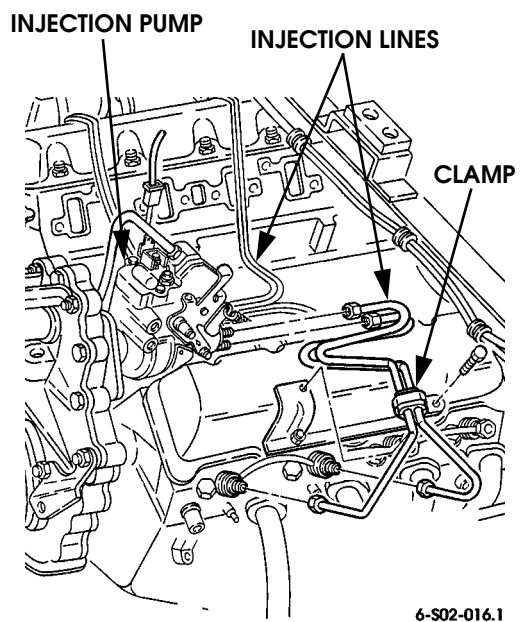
Fuel Injection Line Removal (Non-Turbo Shown)
